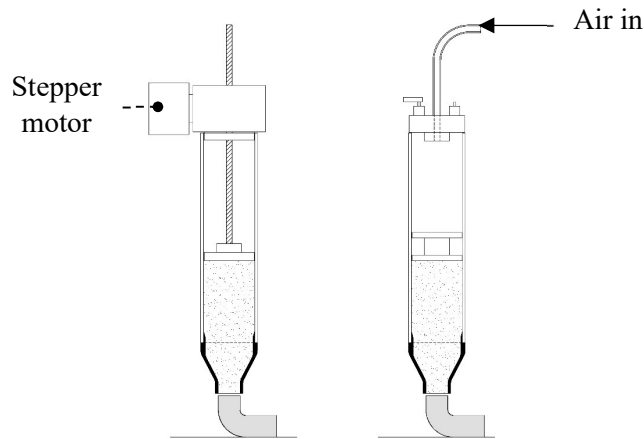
Scheme of the Pneumatic (right) and electromechanical (left) ram extruders.
